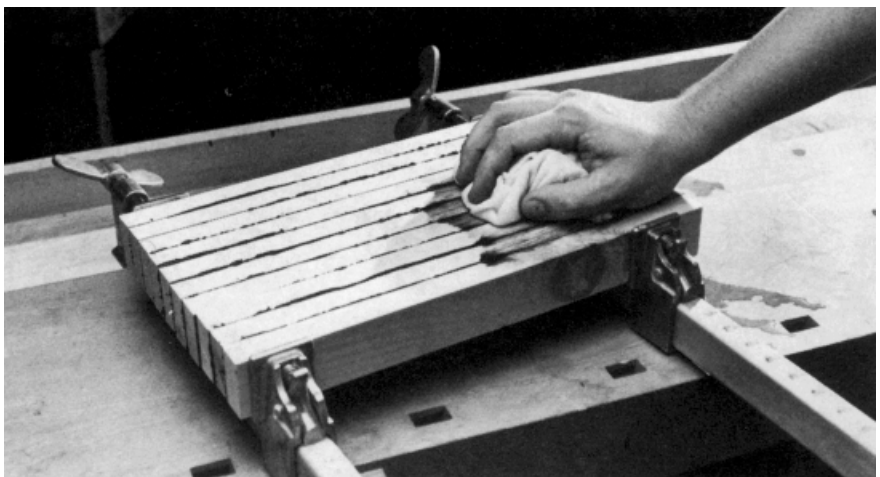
If you wish to plane glued-up stock, scrub the wood with a wet rag while the glue is still wet. Be sure to remove all the glue on the surface of the stock. If any surface glue remains after the glue dries, remove it with a scraper or a belt sander. Warning: Allow the glued-up stock to dry at least 24 hours before planing it.
